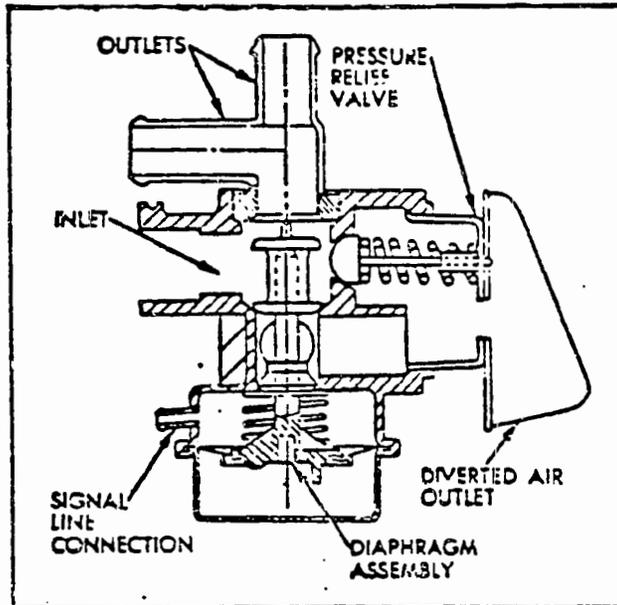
Typical diverter or air by-pass valve with integral pressure relief valve
